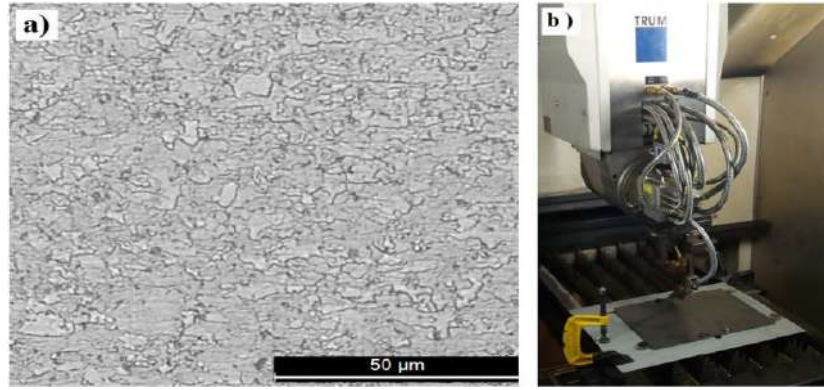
a) Base metal microstructure; b) Laser equipment and welded sample.
